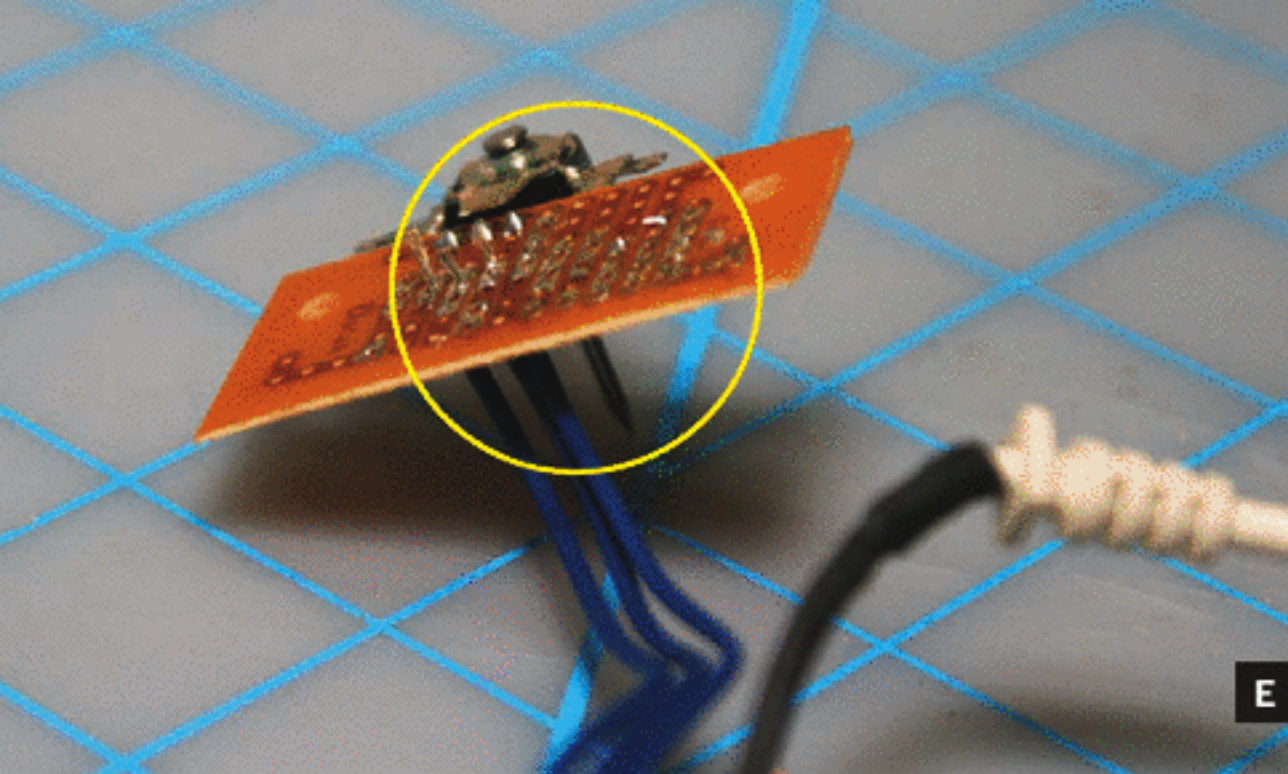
Fig. E: The rotary encoder mounted to the stripboard, with the nail axle (circled) glued in. Fig. F: Tape the stripboard to the inside of the project box with the axle sticking out of the drilled hole.
